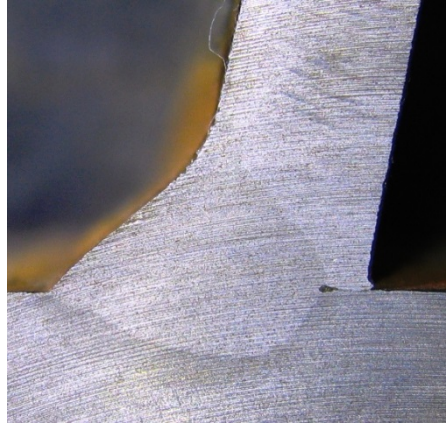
Photo. Macro of specimen SA6-1 (example of closed root condition).
